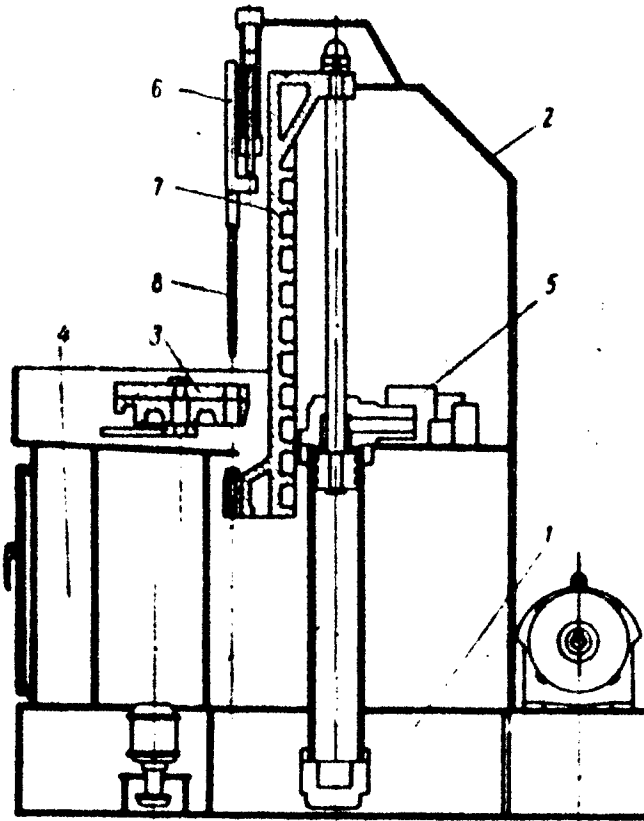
Cross-Sectional Diagram of the M11-56 Machine:
